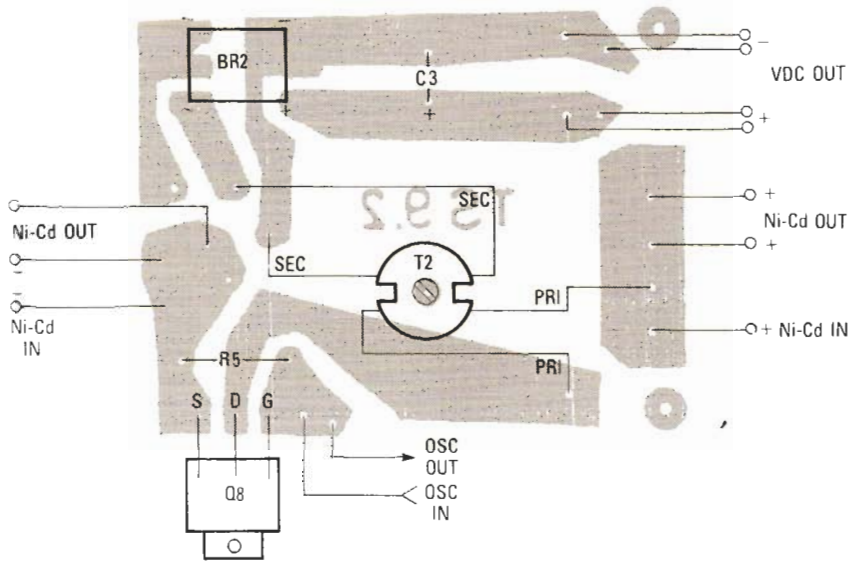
THE Ni-Cd CONVERTER Parts-Placement diagram. Q8's metal tab should be heat sunk by mounting it to the metal project case.
